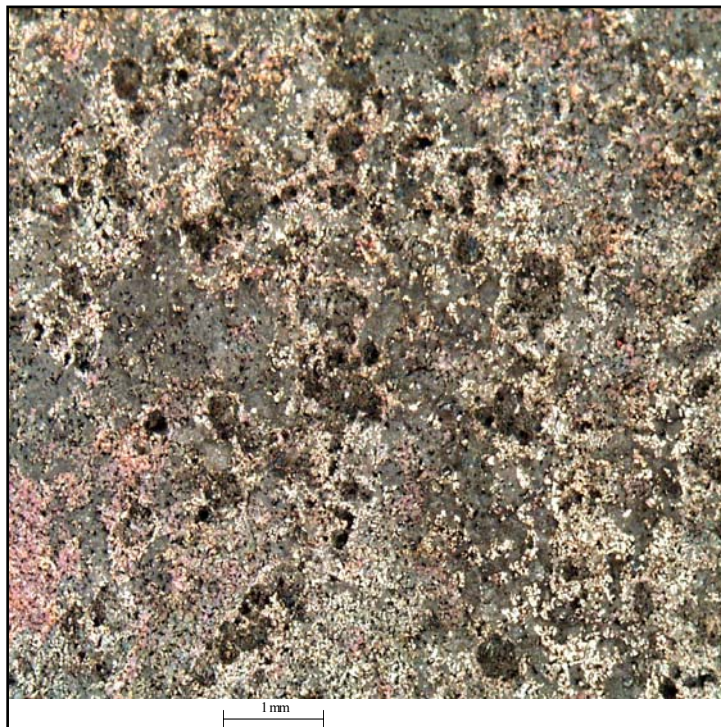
Pitting on the Outside Surface of Pall Fe_3Al Element 21646 Removed From Plenum Location B-51 After GCT4
